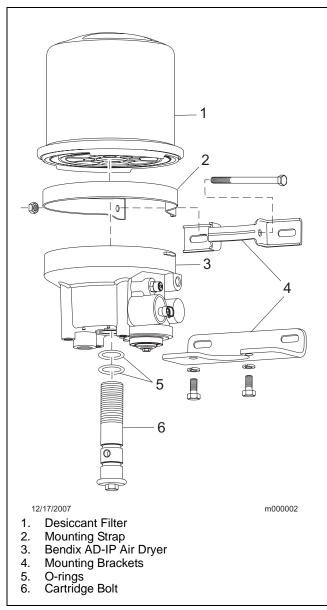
Air Dryer (exploded view of Bendix AD-IP shown)
